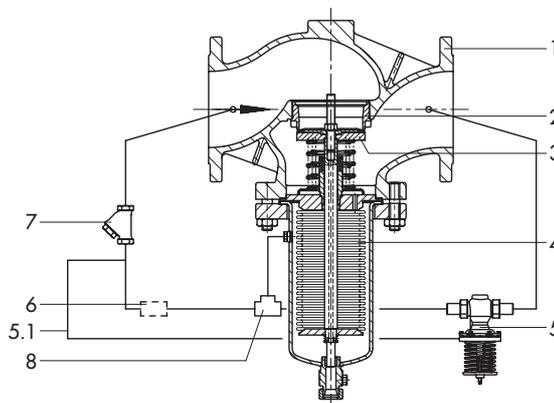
· Type 2335 Excess Pressure Valve (DN 125 to DN 250), principle of operation
